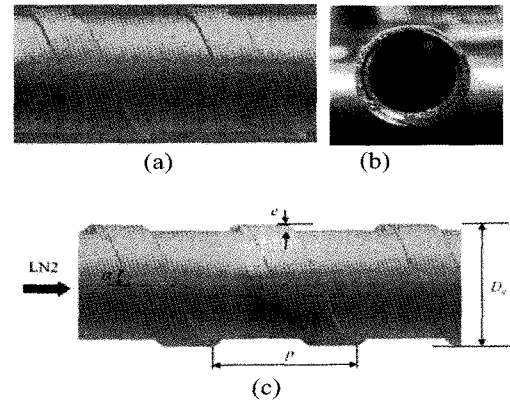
Geometry of Core tube test section (Tube with spiral ribs).
